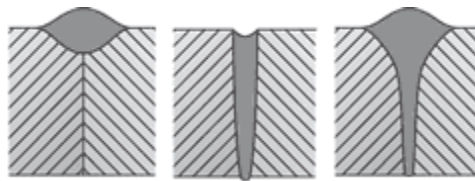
Graphic illustrating differences between GMAW, Laser and Hybrid Laser Welding weld profiles
